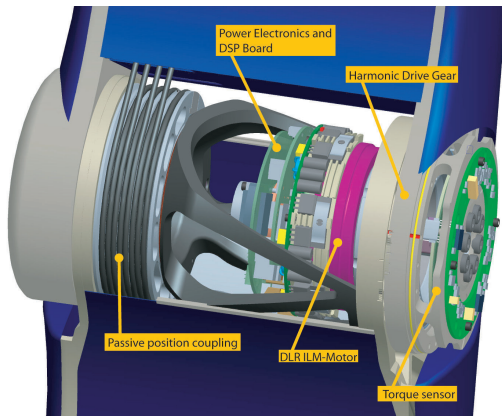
Assembly of the third torso joint. The *passive position coupling* on the left-hand side indicates the cable actuation of the passive fourth joint.
